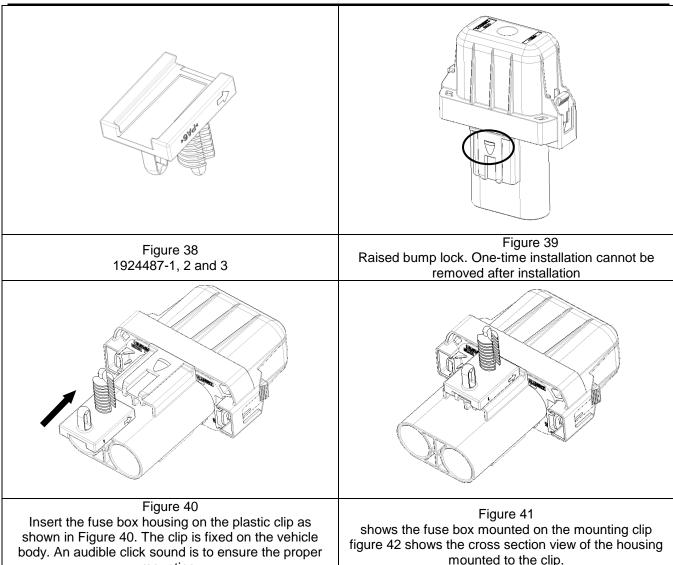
shows the fuse box mounted on the mounting clip figure 42 shows the cross section view of the housing mounted to the clip. mounting.
